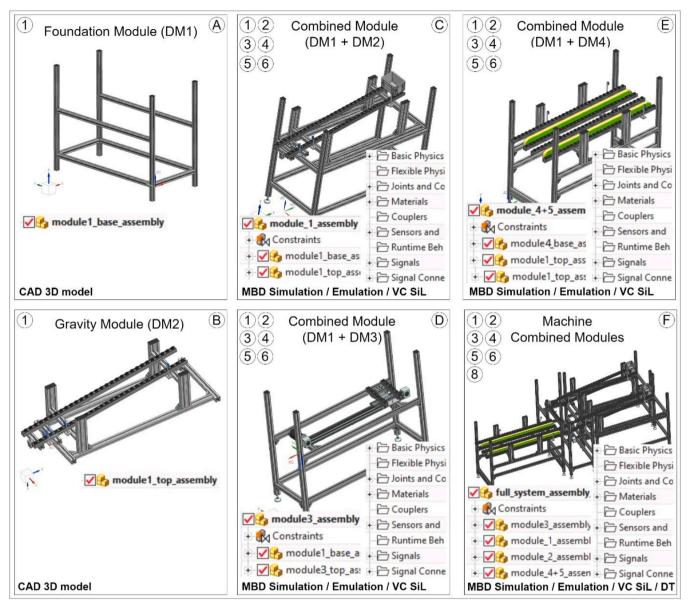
Modular Machine Family (MMF) on VE Mechanical Design Modules.
